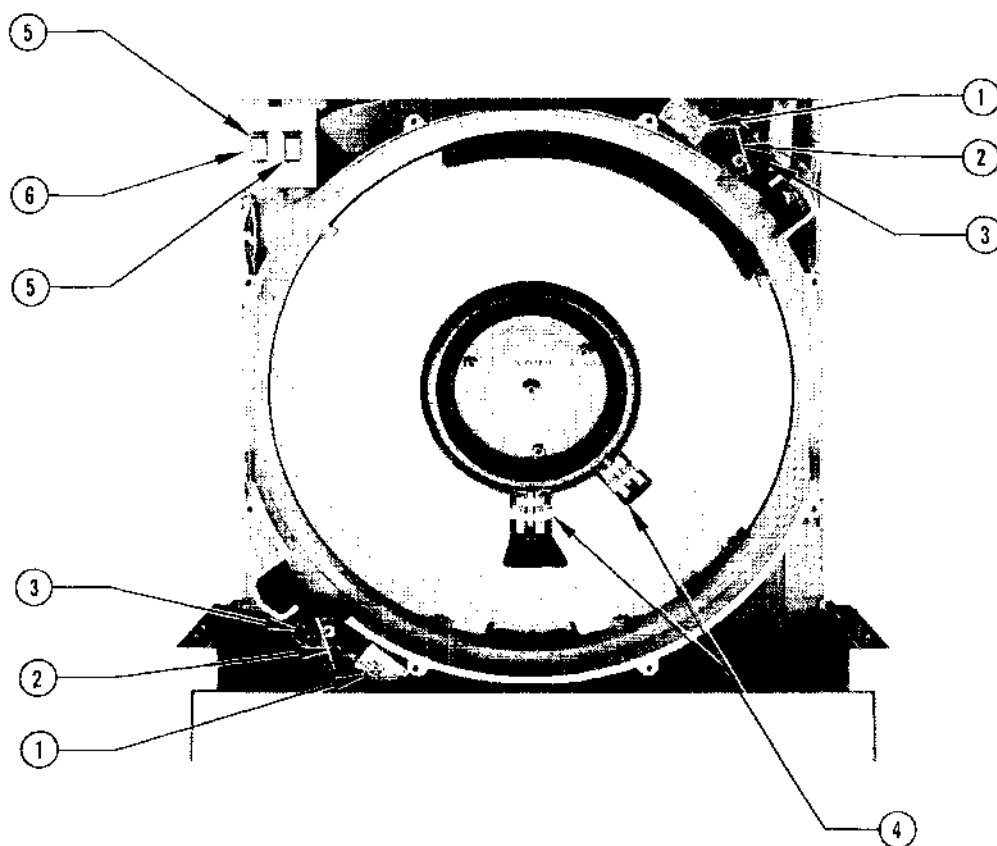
D3000 Disk Drive Photo Parts Index (Top Load Models)
